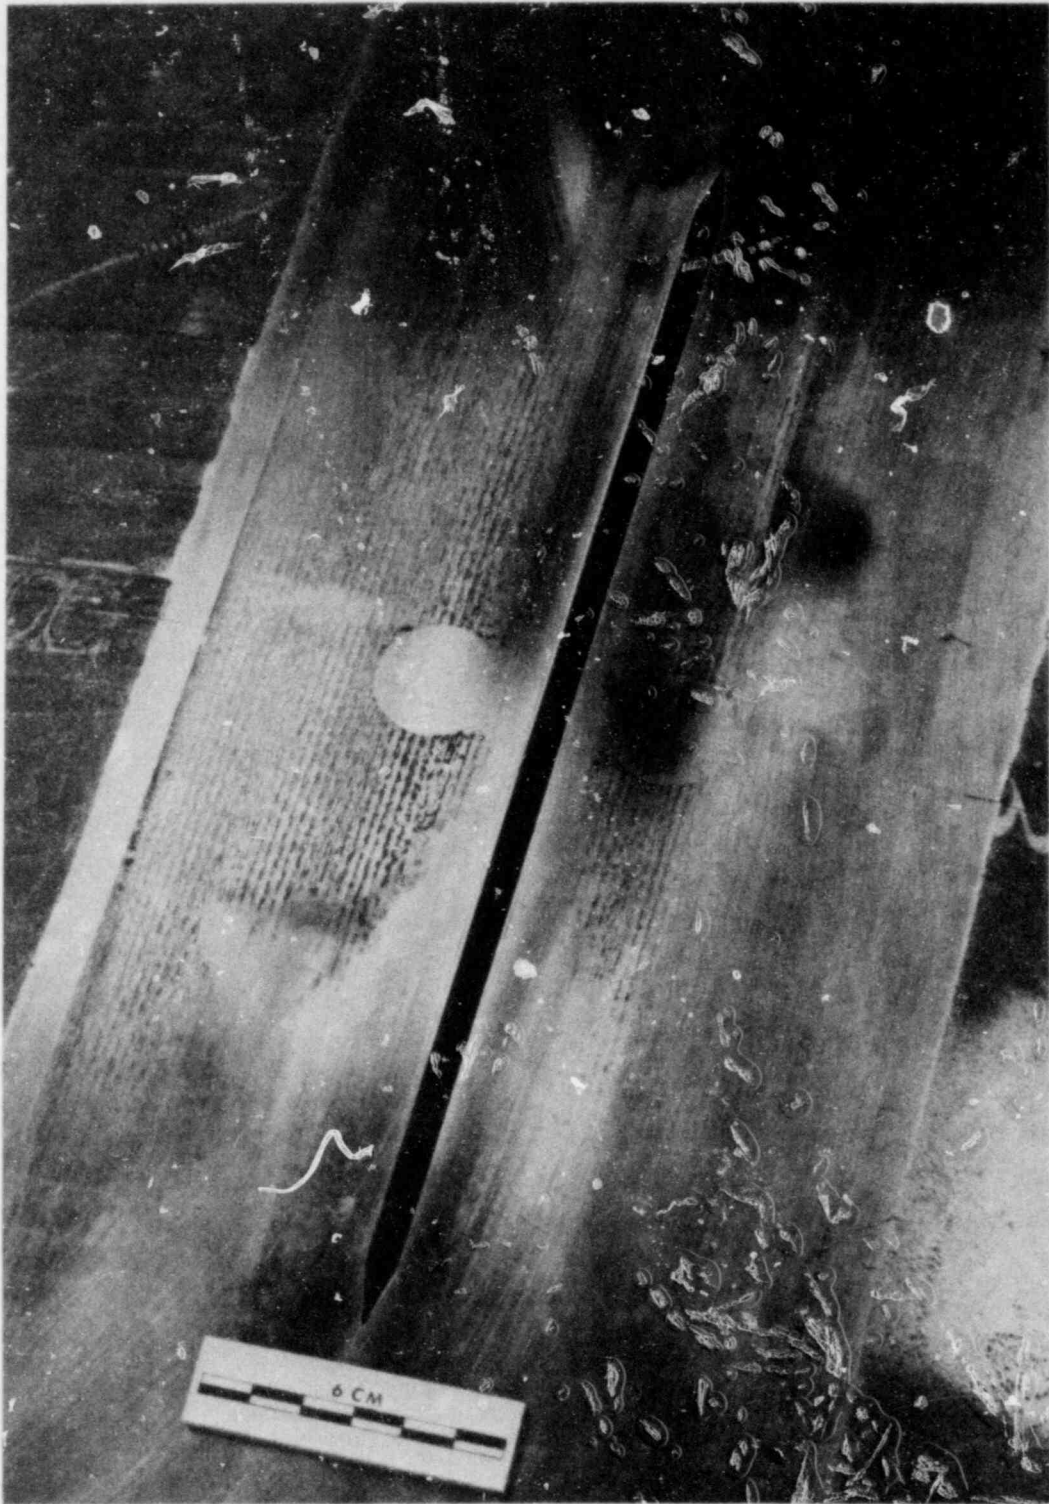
Machined and fatigue-sharpened flaw in vessel V-8A.
